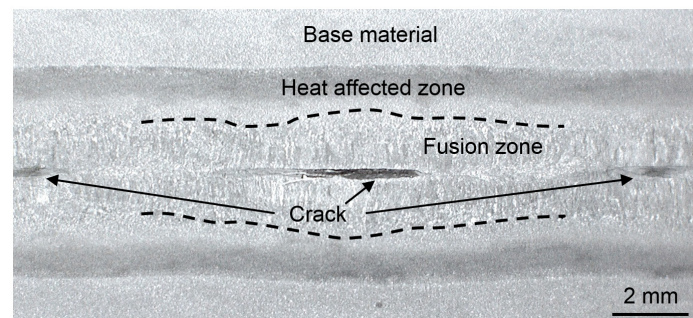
Horizontal section of hybrid weld, showing discontinuous cracks along weld bead centerline.
